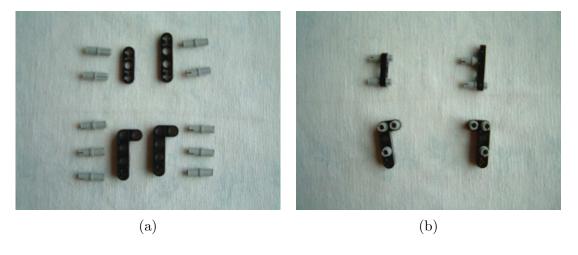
Module 6: (a) the assembly of the connectors of the upper transmission; and (b) its Lego pieces
